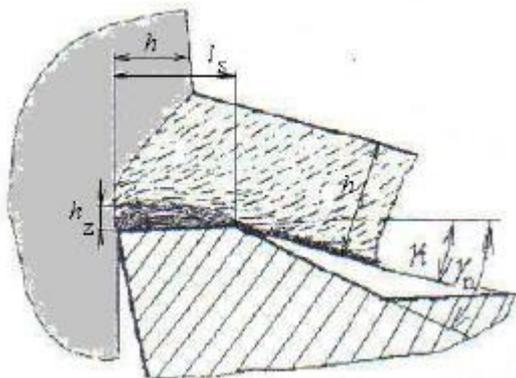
The scheme of the course of secondary deformation in a chip with cutting performed by a tool with a shortened face
